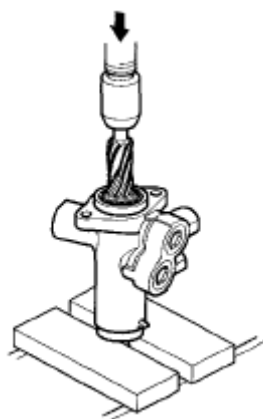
Identifying Pinion Shaft/Sleeve Into Valve Housing
